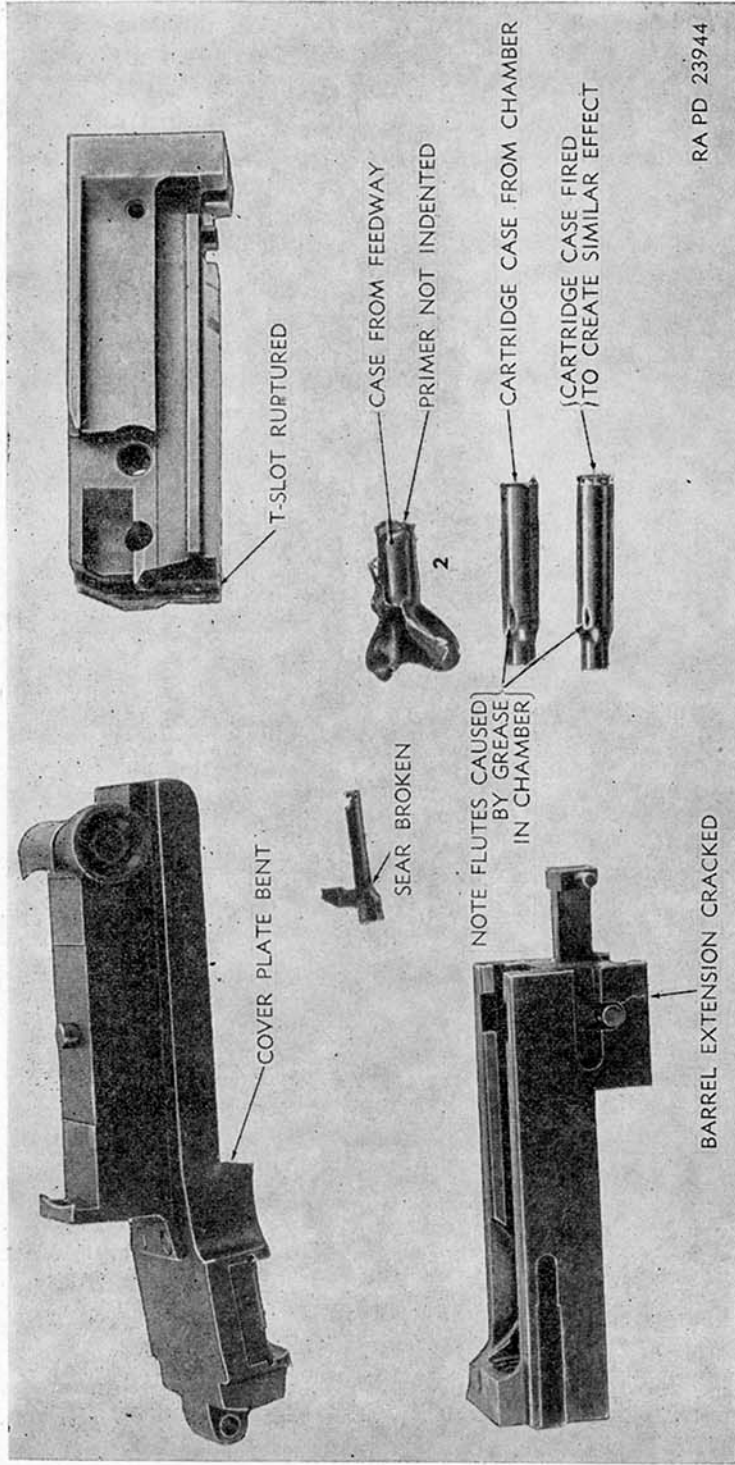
Damage from firing with grease in chamber and bore, cal. .30 machine gun.
